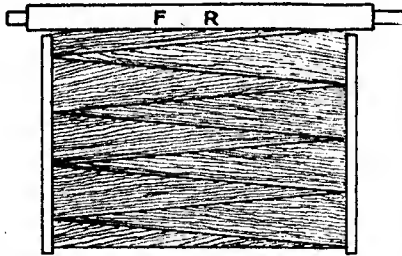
FEED ROLLER AND FEED SHEET WITH BLAMIRE'S LAP.
